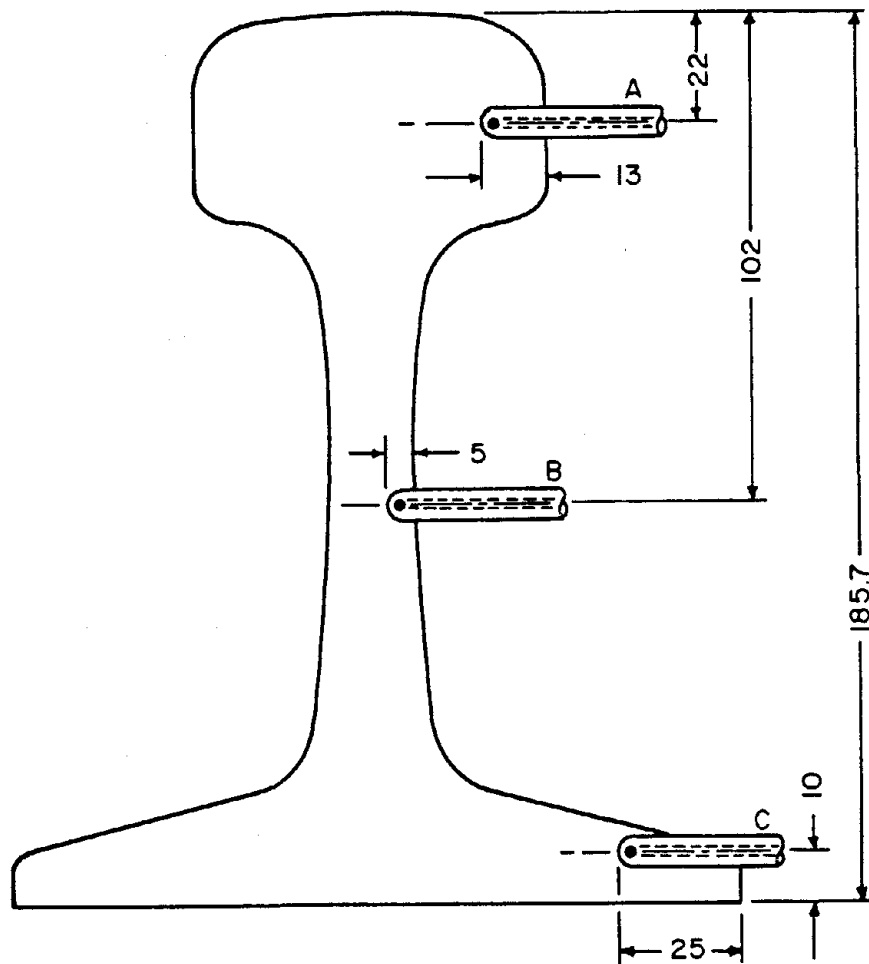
LOCATIONS OF THERMOCOUPLES IN THE WELD METAL OF WELD 9. THERMOCOUPLES WERE CENTERED LONGITUDINALLY IN THE 24 mm GAP. A-HEAD, B-WEB, C-BASE. DIMENSIONS IN mm.
